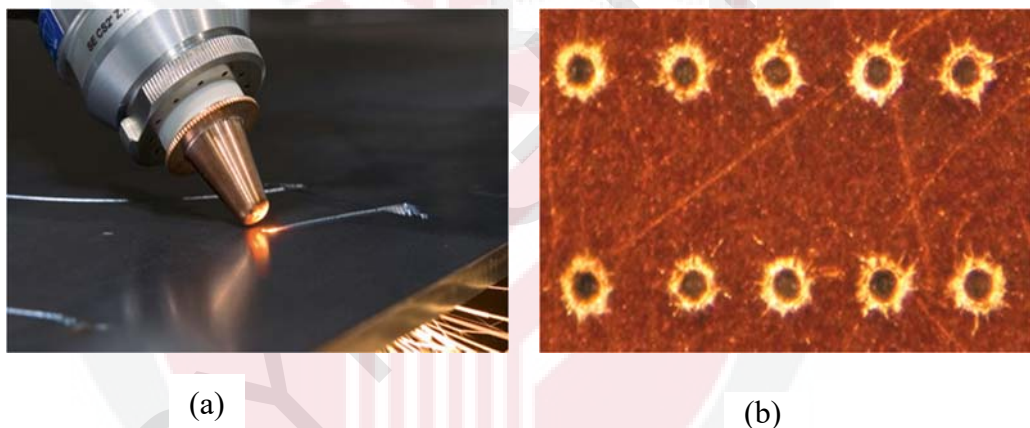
(a) Laser cutting (b) Laser hole drilling
